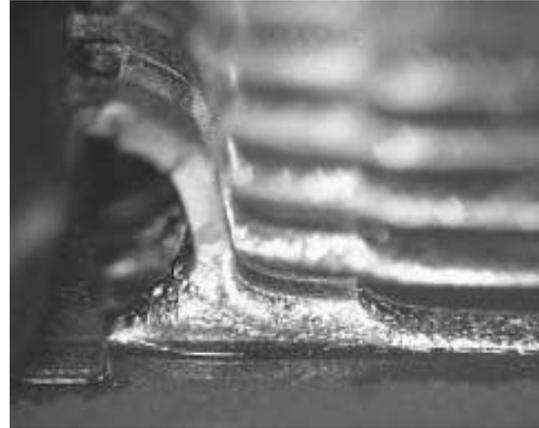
SnPb Finish NS, SnAgCu Solder, OSP PWB Finish
